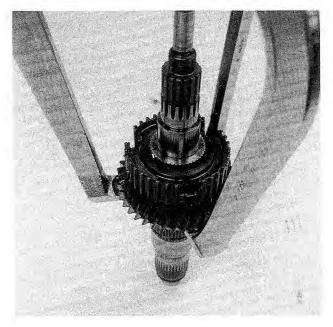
5th/reverse gear guide sleeve assembly being removed from output shaft.
